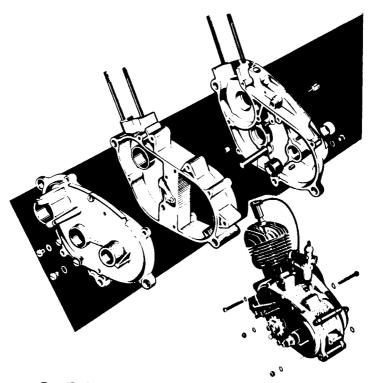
CRANKCASE COMPONENTS ASSEMBLED AND EXPLODED
